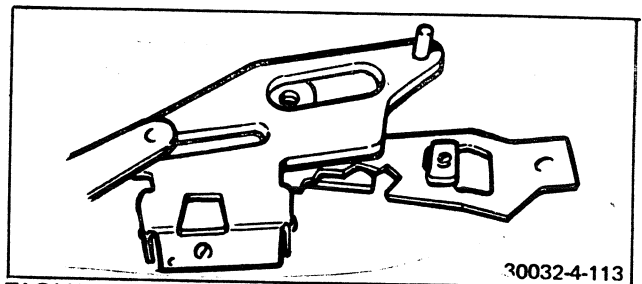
CAM FOLLOWER ASSEMBLY
